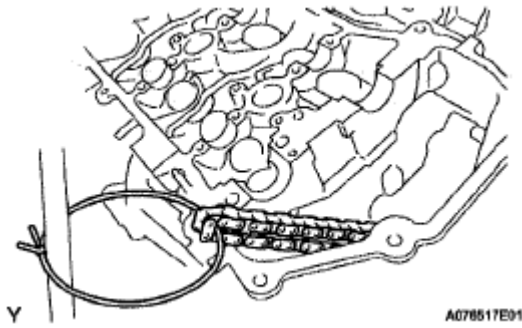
Removing Camshaft Timing Gear Set Bolt
